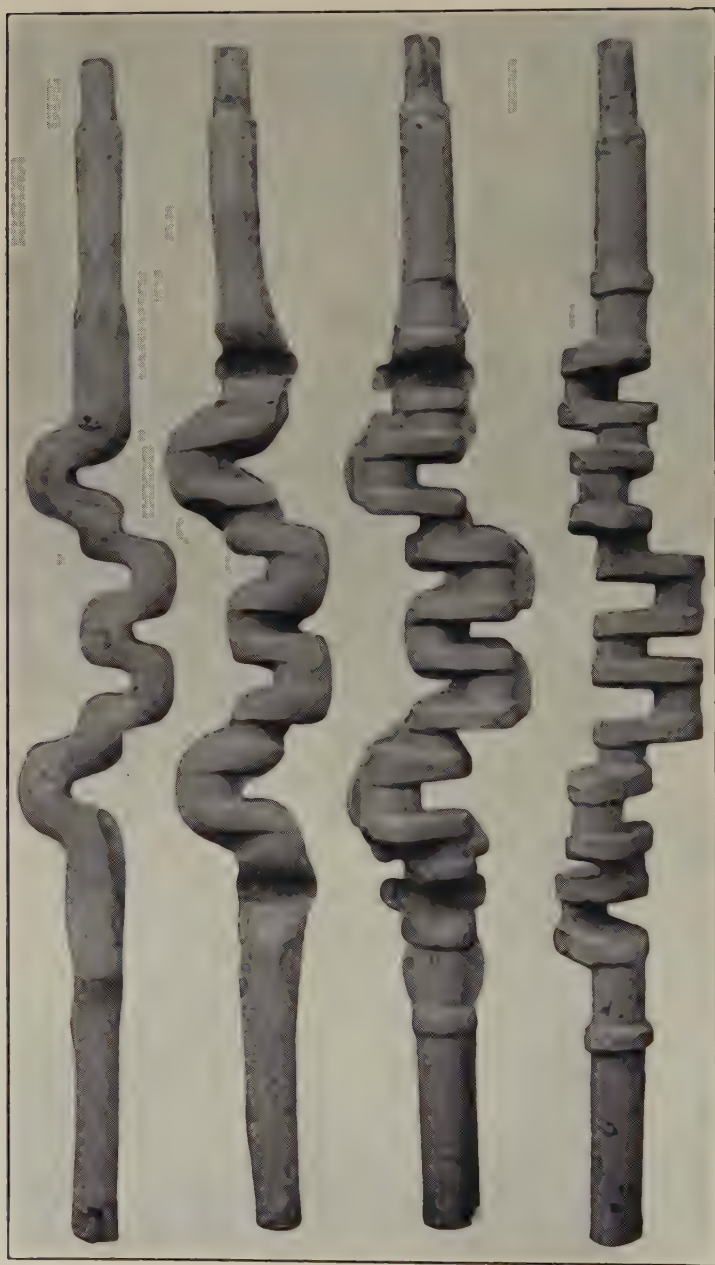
A 6-Throw Crankshaft Forged with Cranks in Proper Alignment During Forging. No Twisting Was Necessary for this Alignment.
